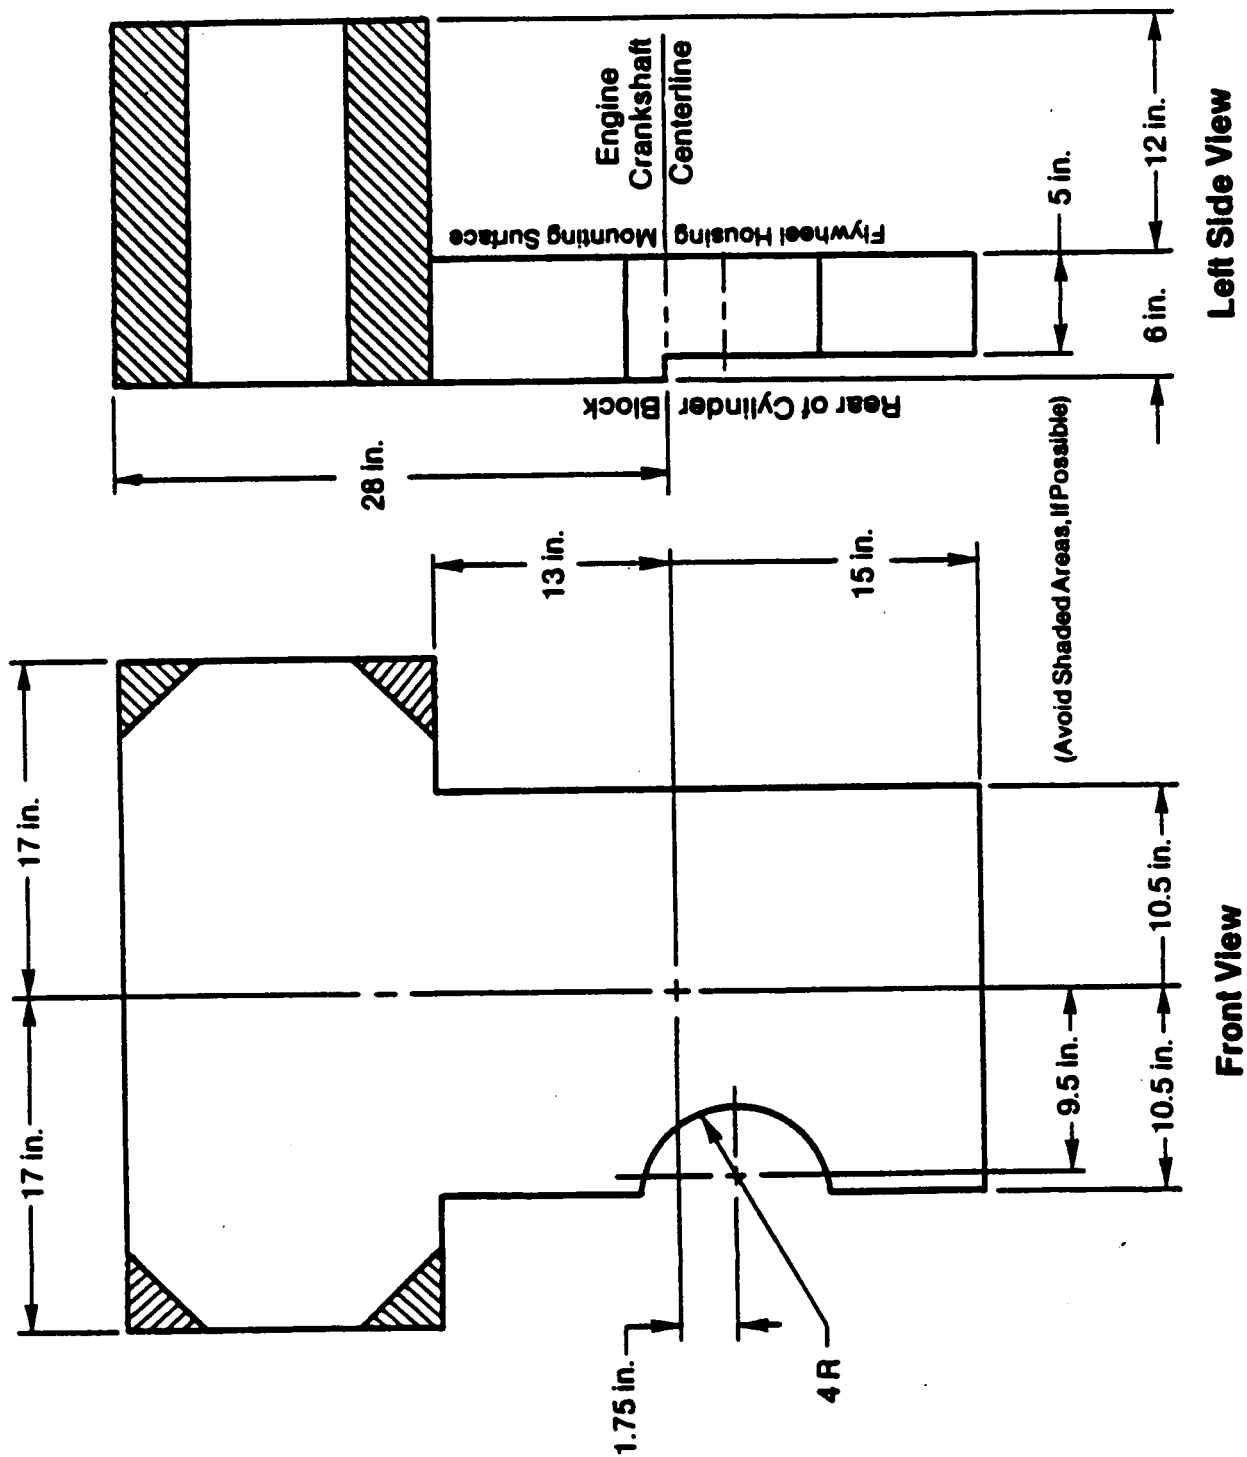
Bottoming Cycle Mounting and Drivetrain Envelope for COE Installation
